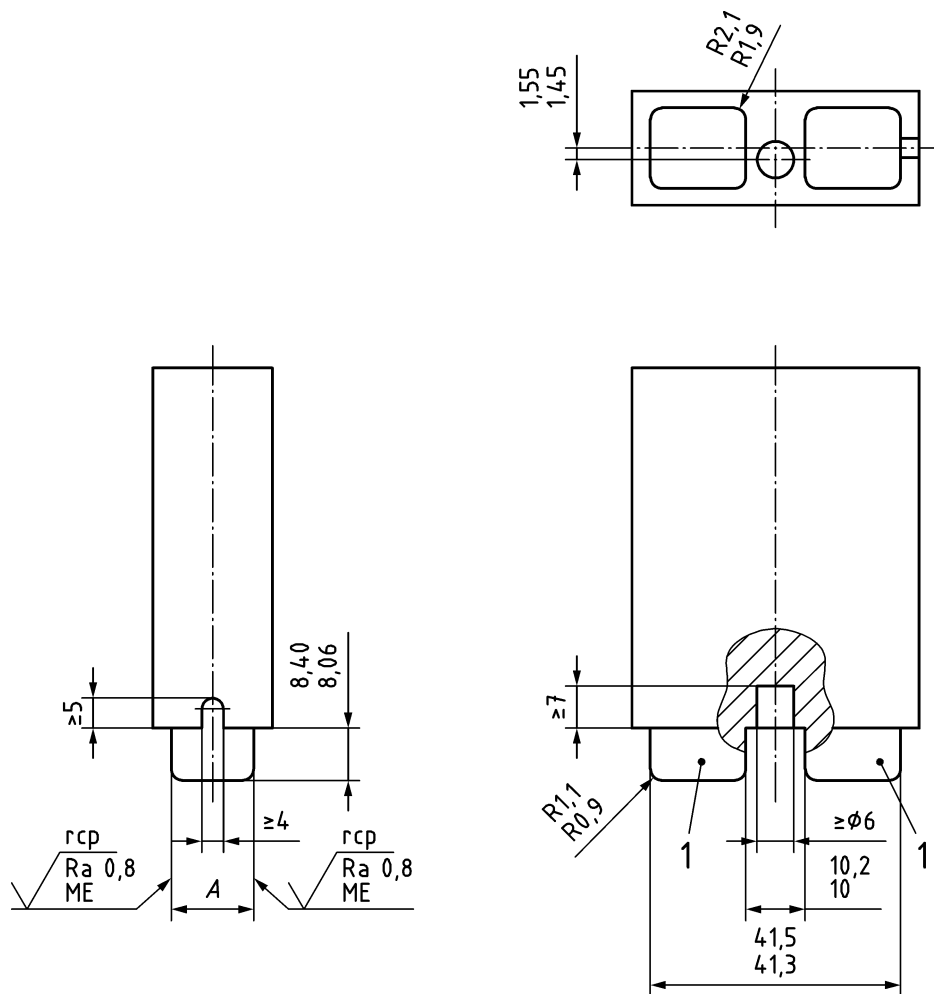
Gauges dimensions for 4 cavities housing series 2 and 3
